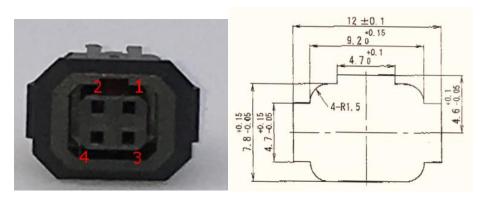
4-pole female connector front view (left), dimensions mounting hole (right)
